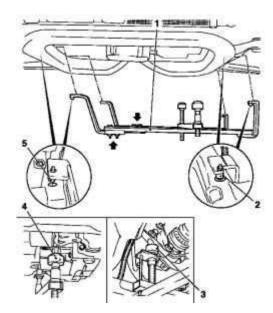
Special device KM-6001-A to remove the gearbox: 1 - a special device KM-6001-A; 2 - neck, 3 - rear supporting bearing, 4 - front supporting bearing, 5 - neck
